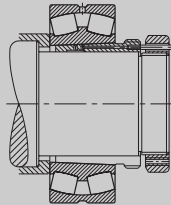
Dismounting of Withdrawal Sleeve by using Hydraulic Pressure
